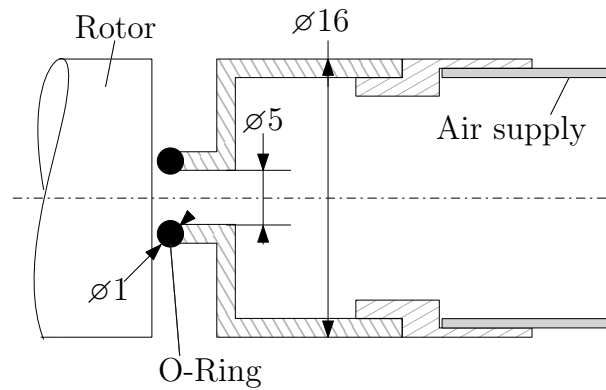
Schematic cut-view representation of the aerostatic axial bearing
